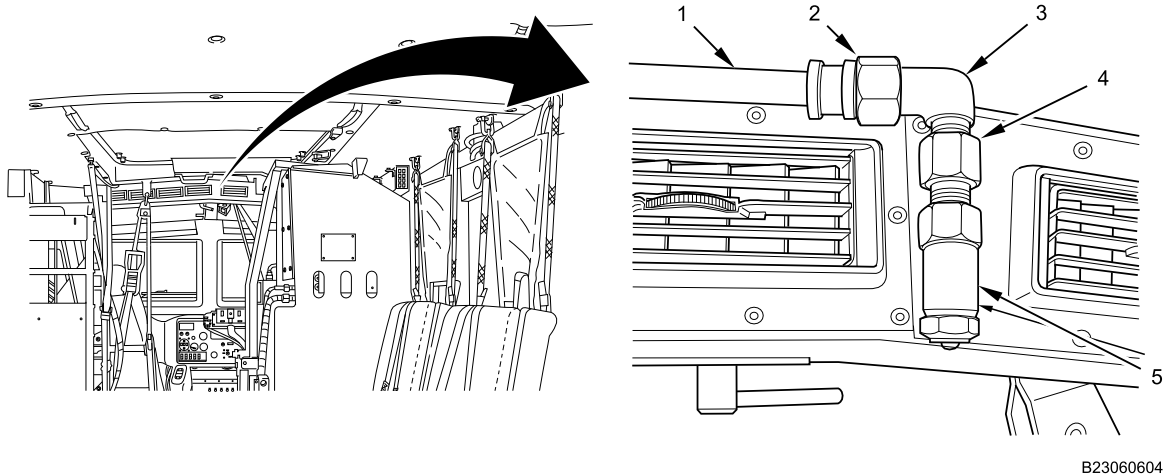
Front FSS Cabin/Crew Dispersion Unit and Pipe.
